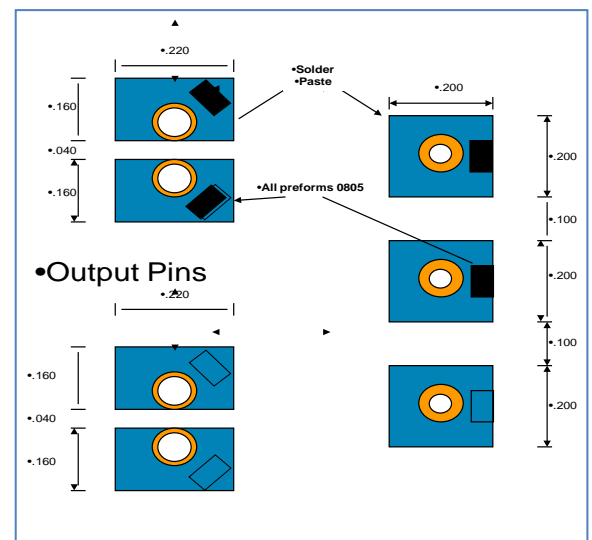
Preform configuration for 7 pin power bricks. This will give 100% holefill for hole size of pin+30 mils.
